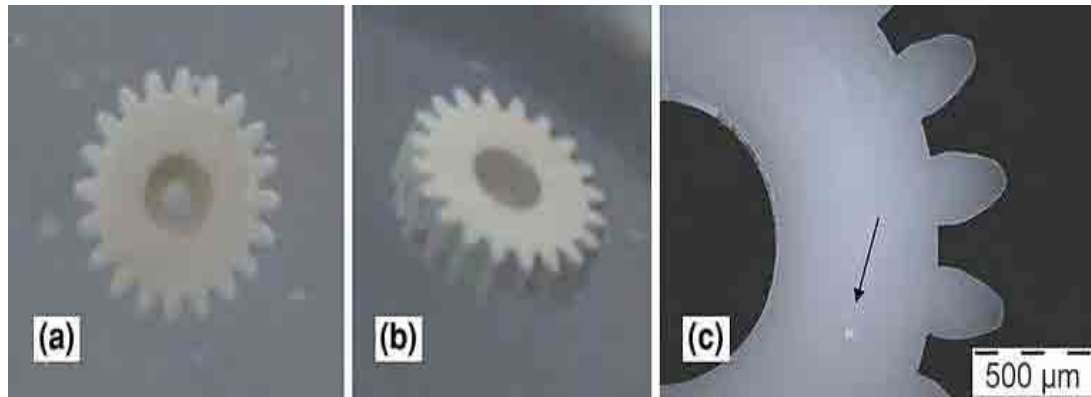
Optical microscopic photographs showing (a) the top and (b) isometric views of a sintered micro gear (c) well defined gear teeth.
